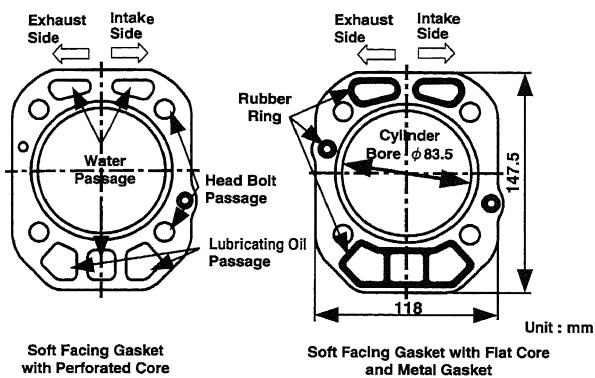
Shape and Dimensions of Test Cylinder Head Gaskets
